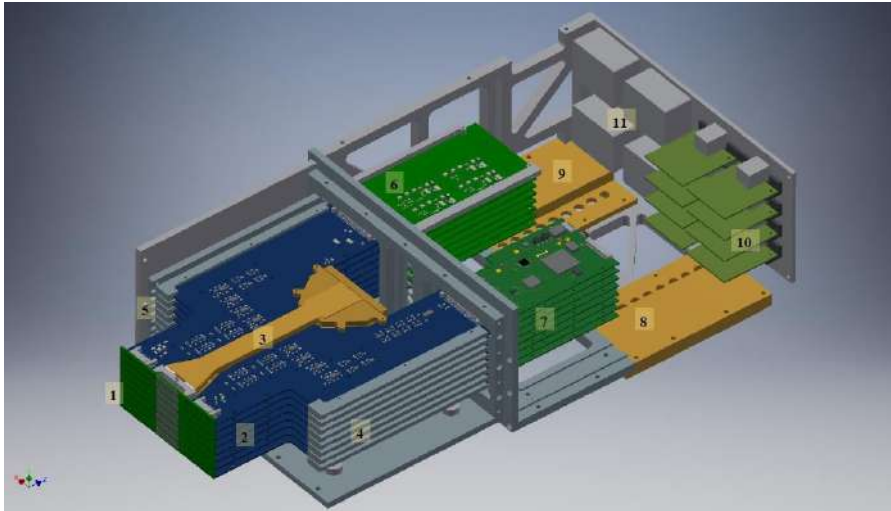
Detector system: (1) detectors and detector PCBs, (2) front-end PCBs, (3) brass profile with cooling liquid flowing inside, (4) insertion guides at flanks of detecting heads, (5) rails for eight detection heads, (6) power supply and filters PCBs, (7) back-end PCBs, (8) inlet cooling distribution, (9) outlet cooling distribution, (10) ethernet PCBs, (11) power supply connectors
